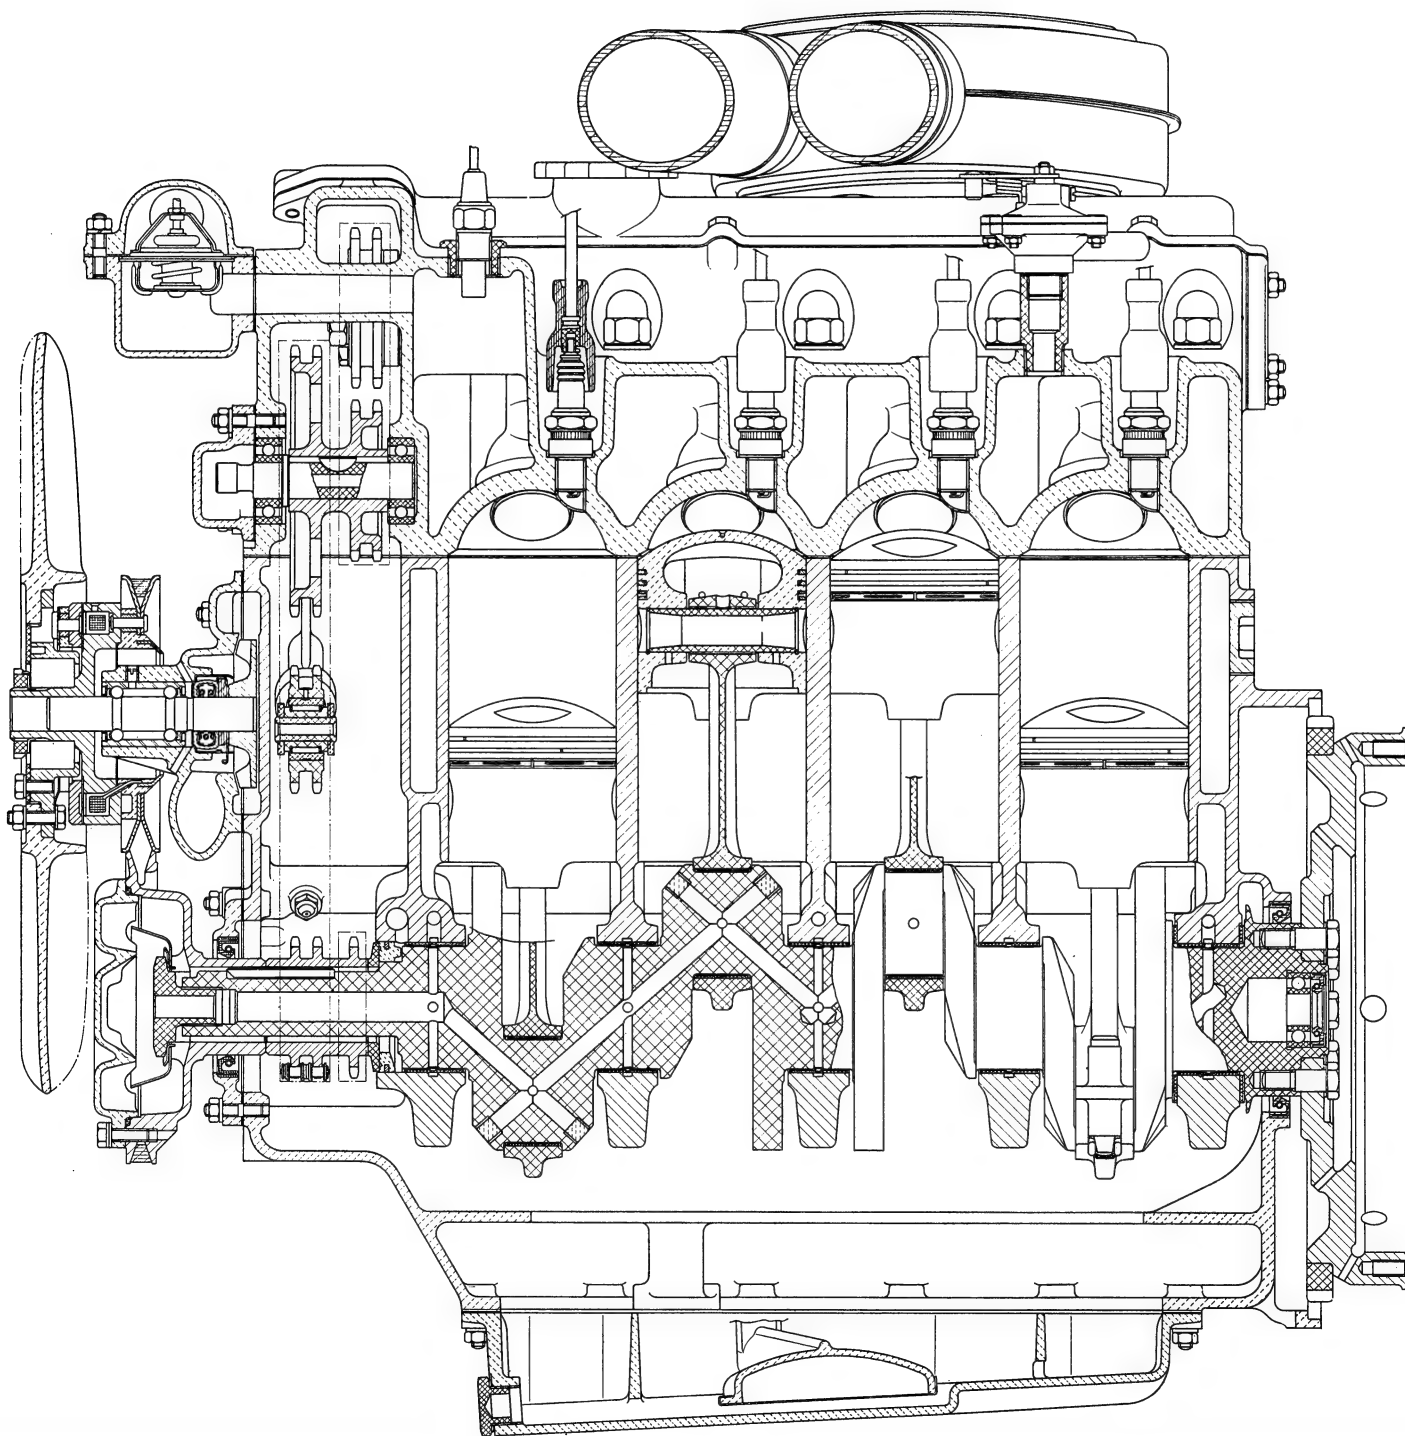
Side sectional view of engine 118 B.000 across cylinders.
